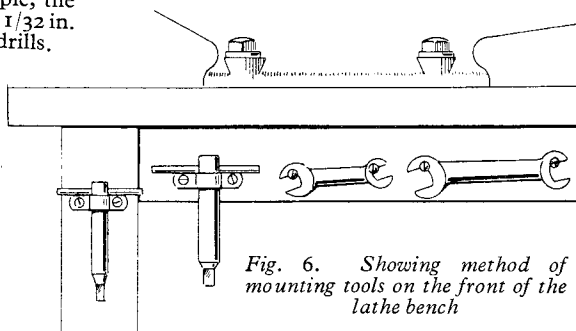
Showing method of mounting tools on the front of the lathe bench
